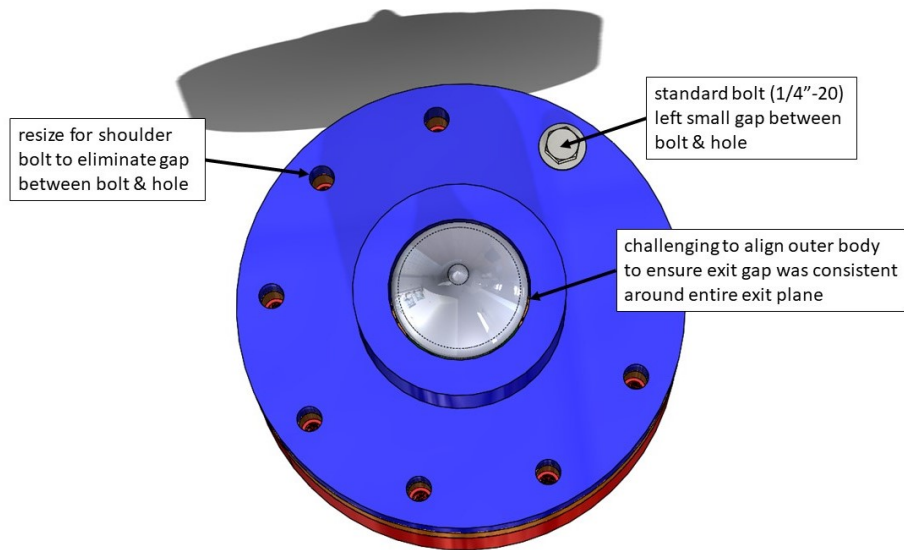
Recommended modification to outer body bolt holes to reduce assembly challenges
